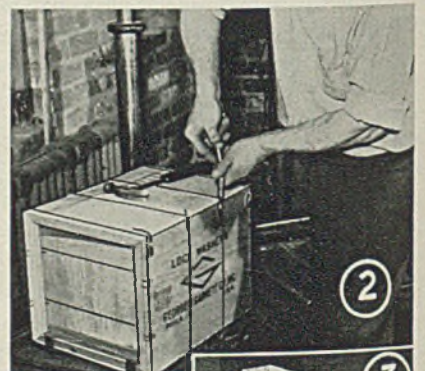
Box is now closed by use of a simple tool that locks the wire loops. Note that a flat steel pallet is used underneath the box while it is on the conveyor line.
